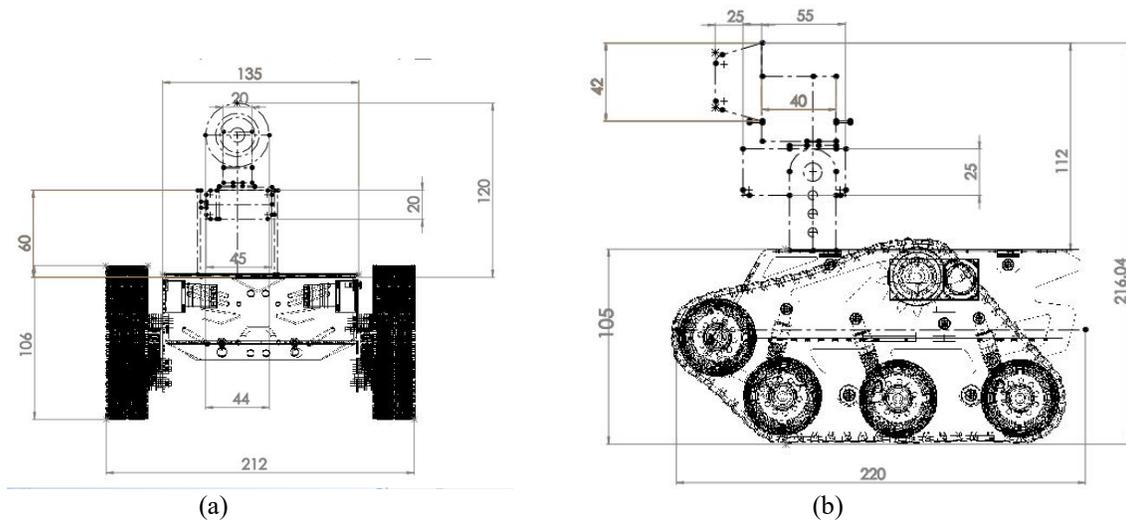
(a) Front view of mechanical drawing in millimeter scale (b) Side view of Mechanical Drawing in millimeter scale
